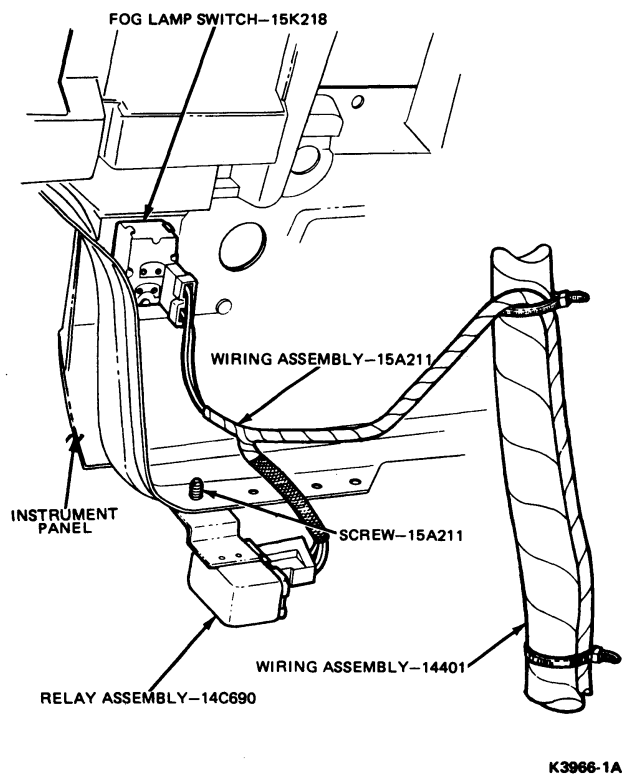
Fog Lamp Switch—F-100—F-350 and Bronco
